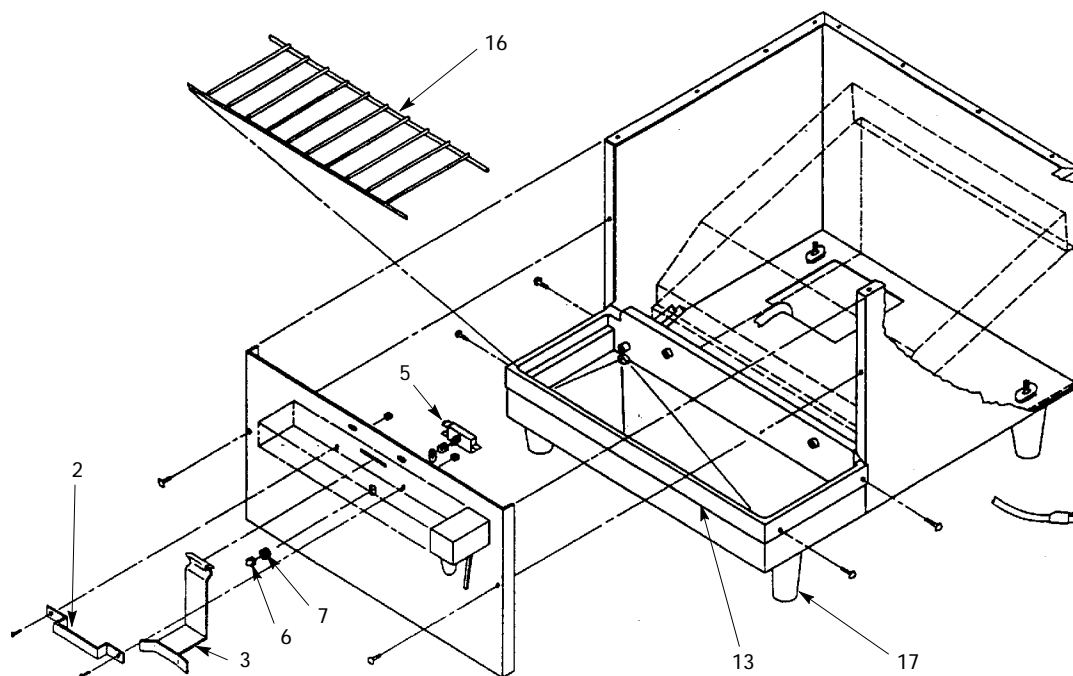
EXPLODED VIEW LOWER SECTION TJ90
